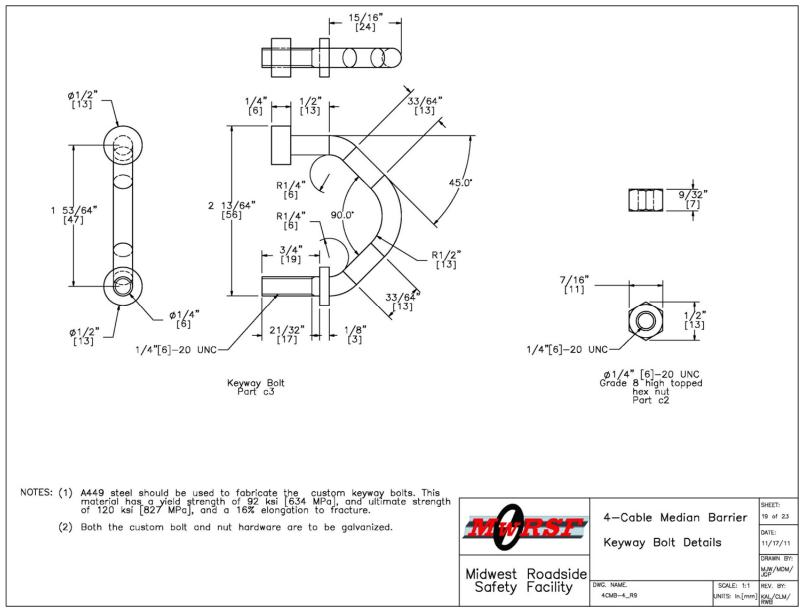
Keyway Bolt Detail, Test No. 4CMB-4
